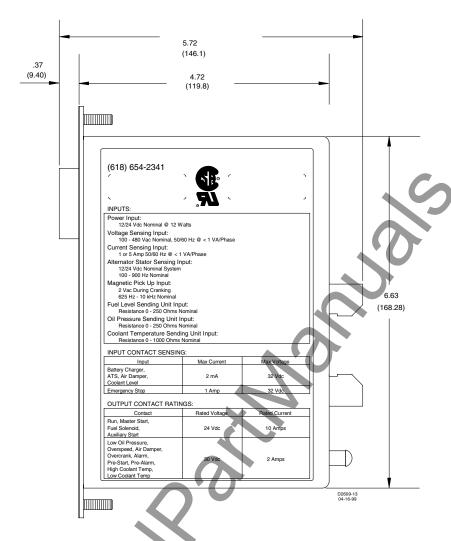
DGC-2000 Overall Dimensions In Inches (Millimeters)
